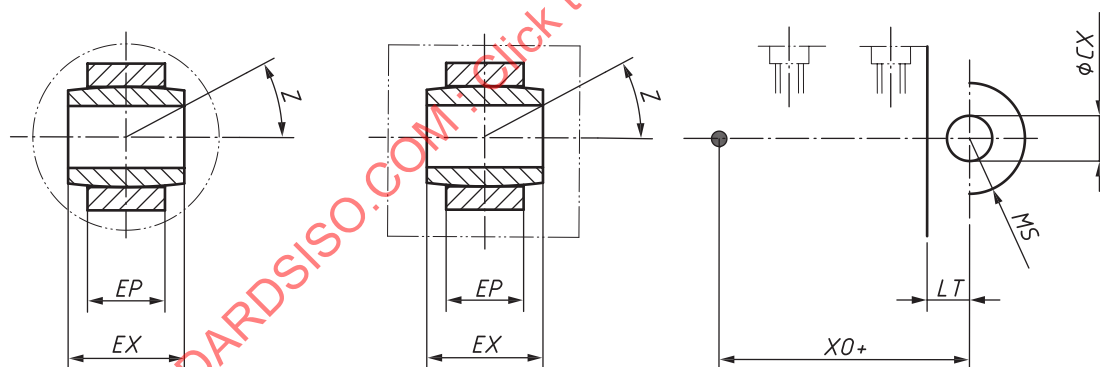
MP5 — Cap, fixed eye with spherical bearing
